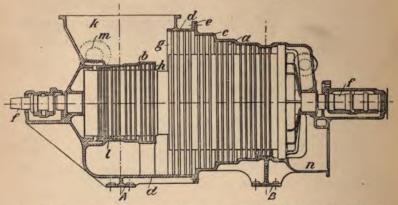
Parsons Arrangement of Main and Reversing Turbines in One Casing.
